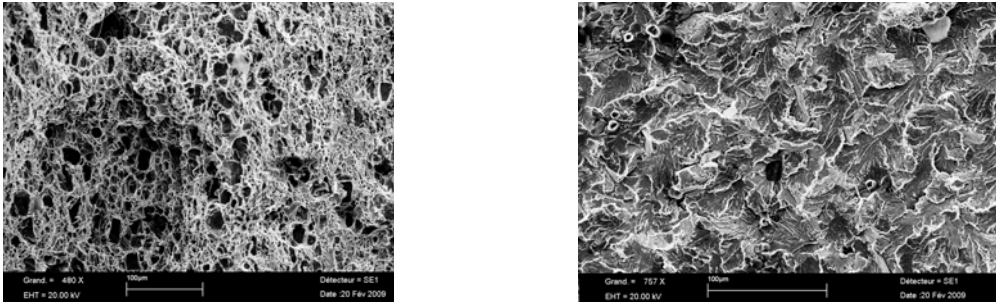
Fracture surfaces of the steel code 95A obtained after impact-tensile-crash test: Ductile fracture (left) and Brittle fracture showing a cleavage surface (right)
